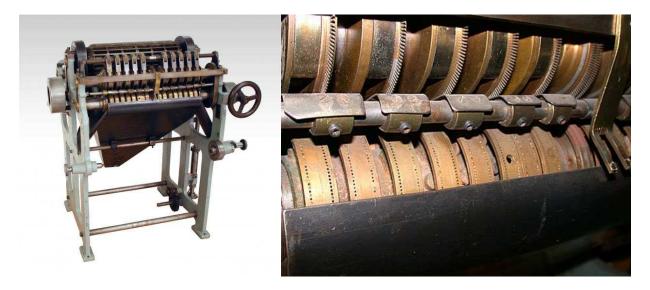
A rotary perforation machine used by the Bureau of Engraving and Printing¹⁰.
